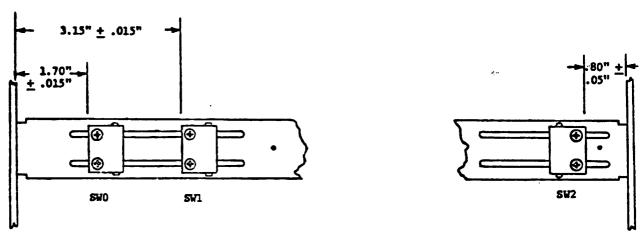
REED SWITCHES AND MOUNTING BRACKET
